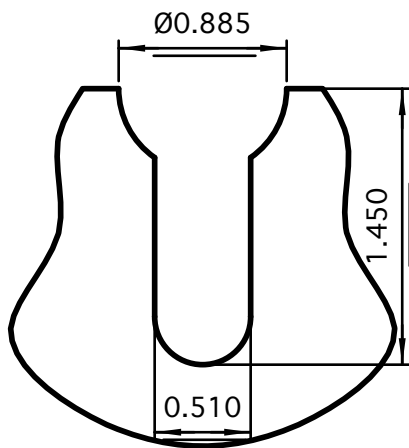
Cross-section sketch of typical fore-stock, showing dimensions of required inletting.
